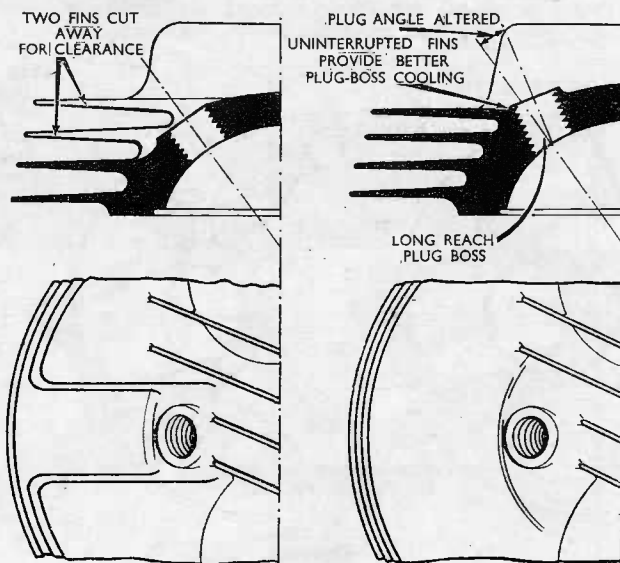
(Left) Section and plan of head with two fins cut away to provide plug clearance. (Right) Use of a long-reach plug at a modified angle provides uninterrupted finning with the same firing point.
